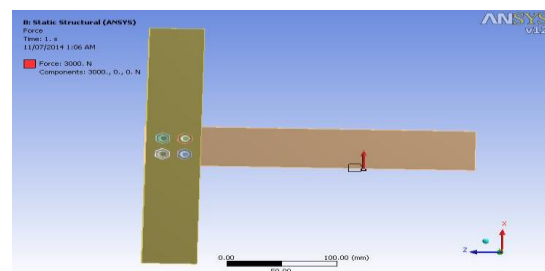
Symmetrical eccentric loaded bolted joint
